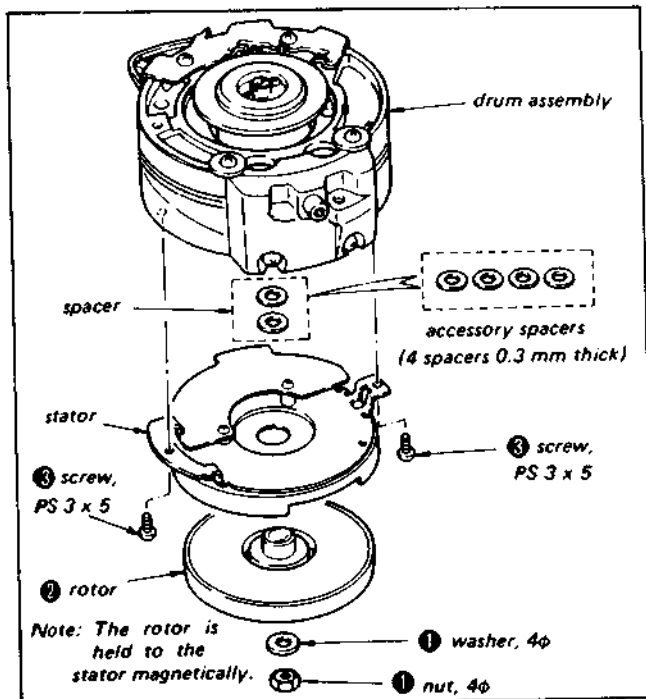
Removal of the stator and rotor when replacing the drum
